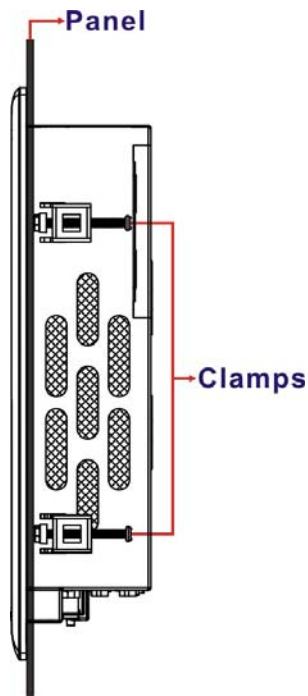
Tighten the Panel Mounting Clamp Screws
